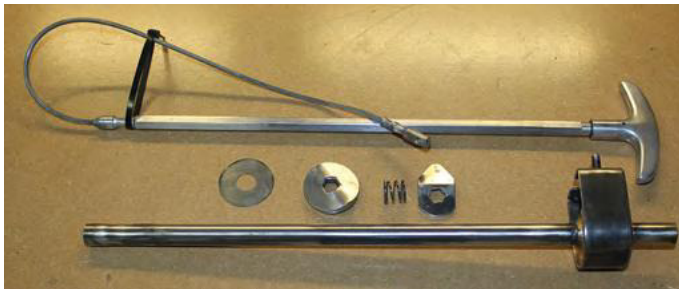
All of the parts have been cleaned, and the guide tube housing has been stripped for painting. If locking replacement parts are needed, an entire kit is available as part number 644.242.31S. It may be a good idea to replace the pressure spring alone; it is part number 644.24.229.
